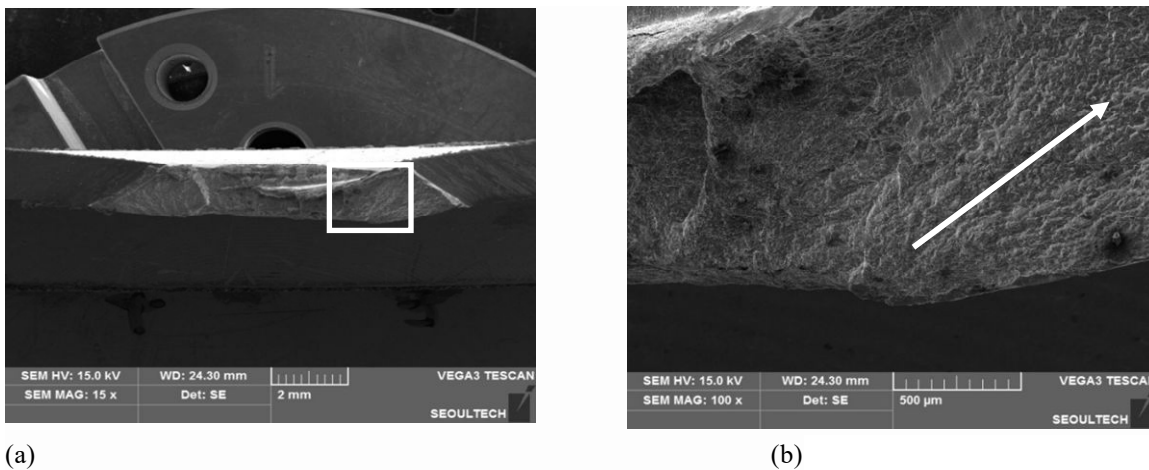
Fatigue failure mode of the tensile-shear specimen
